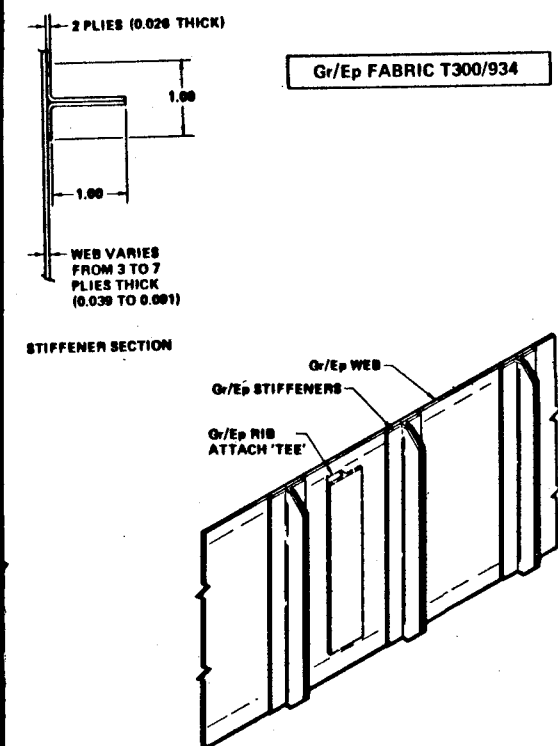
YC-14 Elevator Gr/Ep Spar Web Study – 'Tee' Stiffened
